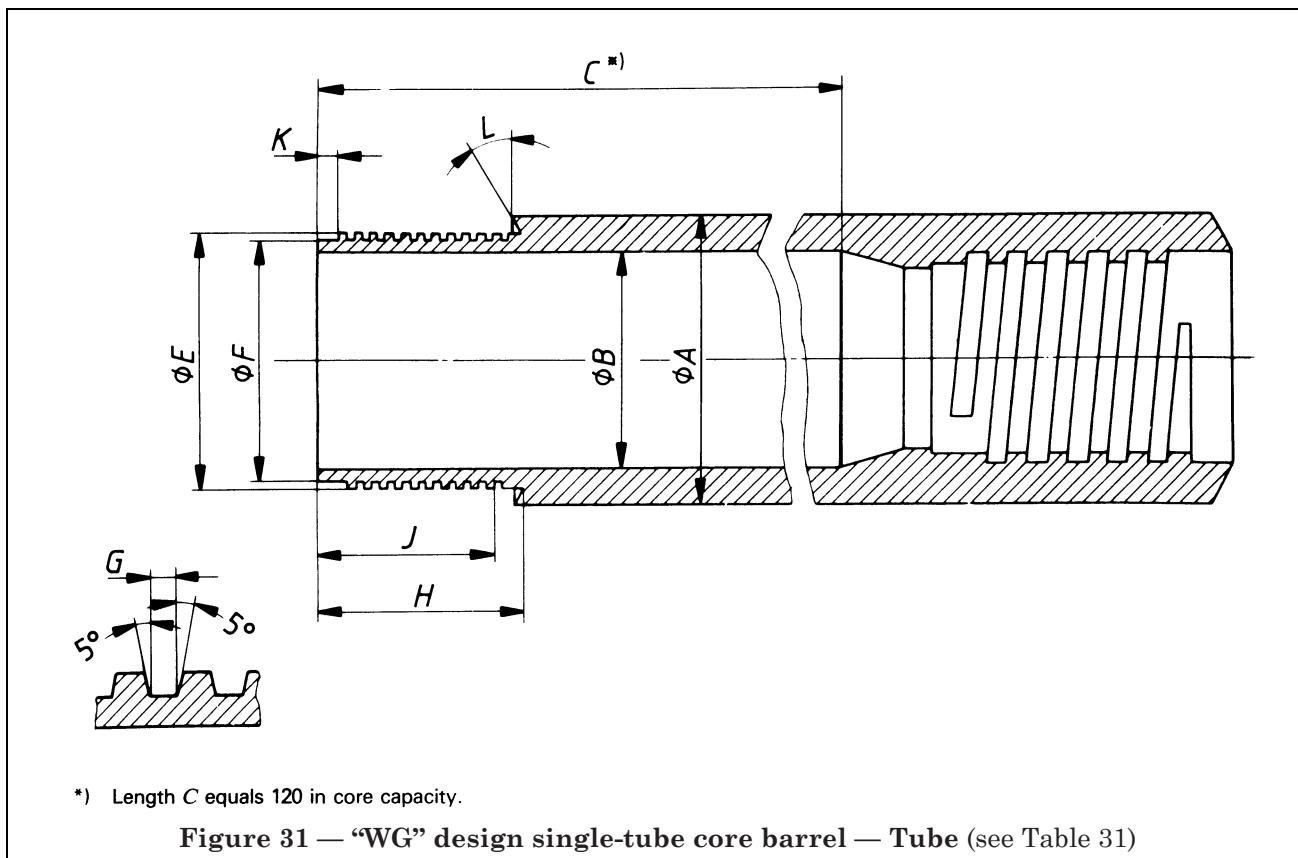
“WG” design single-tube core barrel — Tube (see Table 31)
